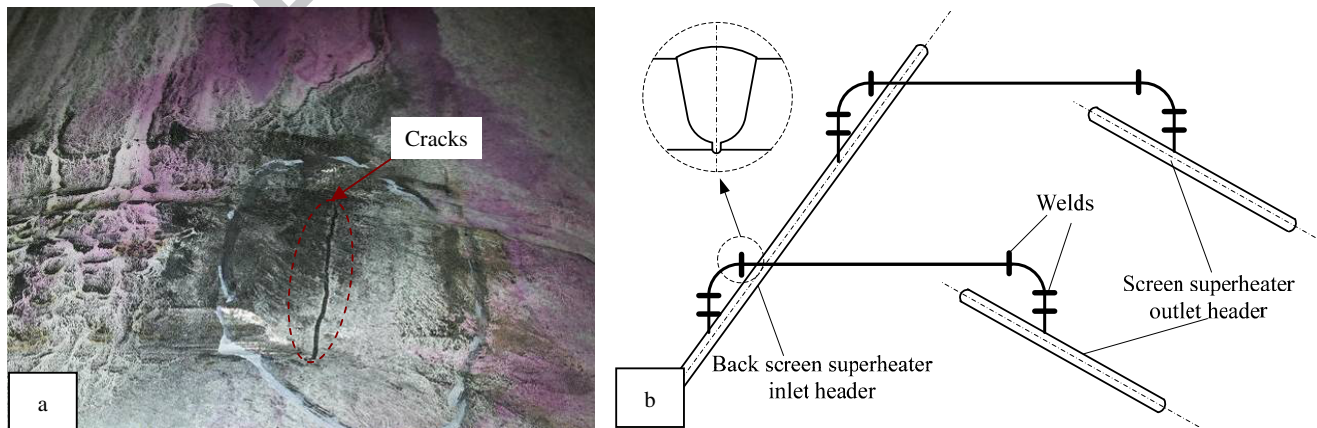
General view of the cracks analyzed. (a) Cracks in welded joint; (b) Assemble diagram of the investigated steam pipe.
